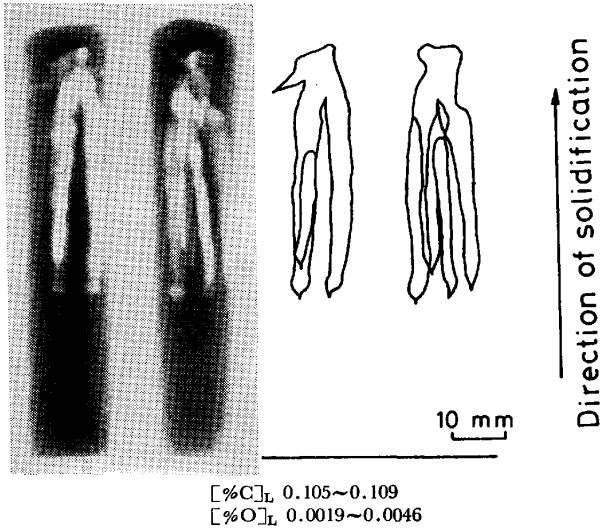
X-ray photographs and schematic drawings of CO macroblowholes.
